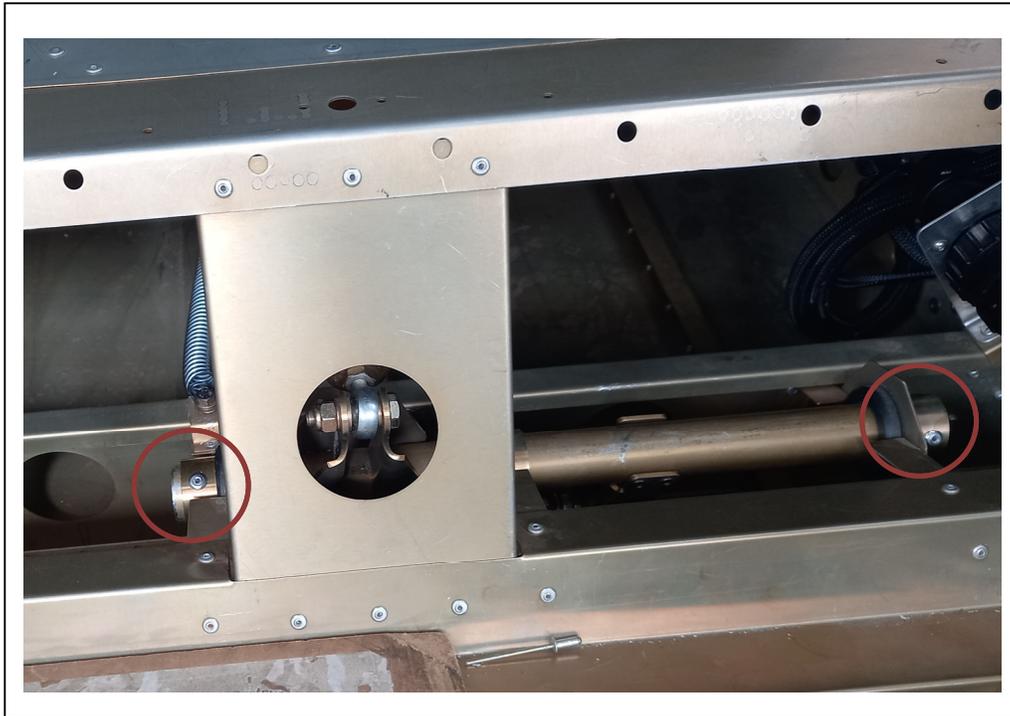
Elevator torque tube with elevator torque tube locking bushes installed
